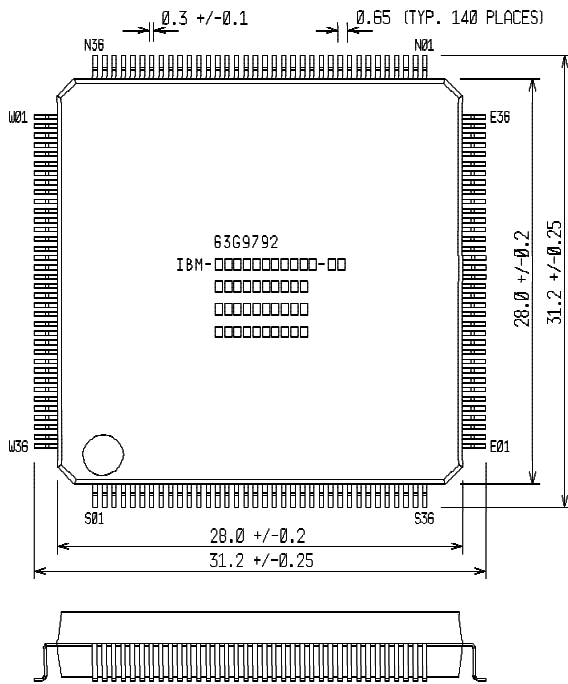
ALDC1-40S-M Top and Side Views. All length and tolerance dimensions in millimeters. The orientation mark is shown in the lower left-hand corner of the top view.
